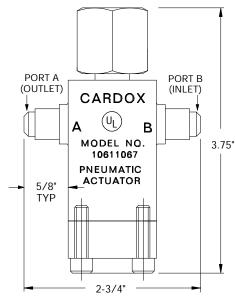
Pneumatic Booster Assembly Stock Number 10611067
